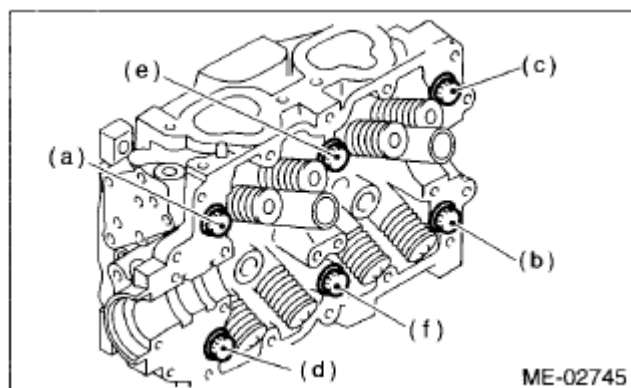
Identifying Cylinder Head Bolts Removal Sequence
